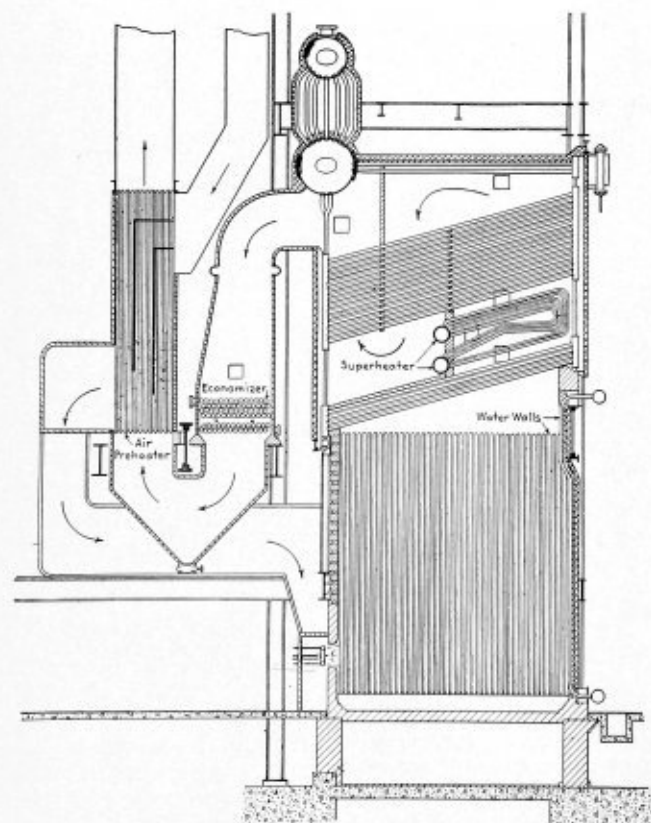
Foster-Wheeler steam generator for Humble Oil Company, Unit J, Table 1
